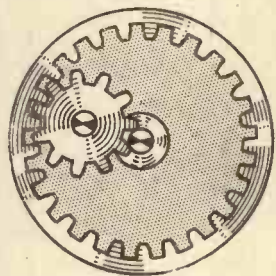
Internal toothed gear wheel and pinion which maintains the direction of rotation.
